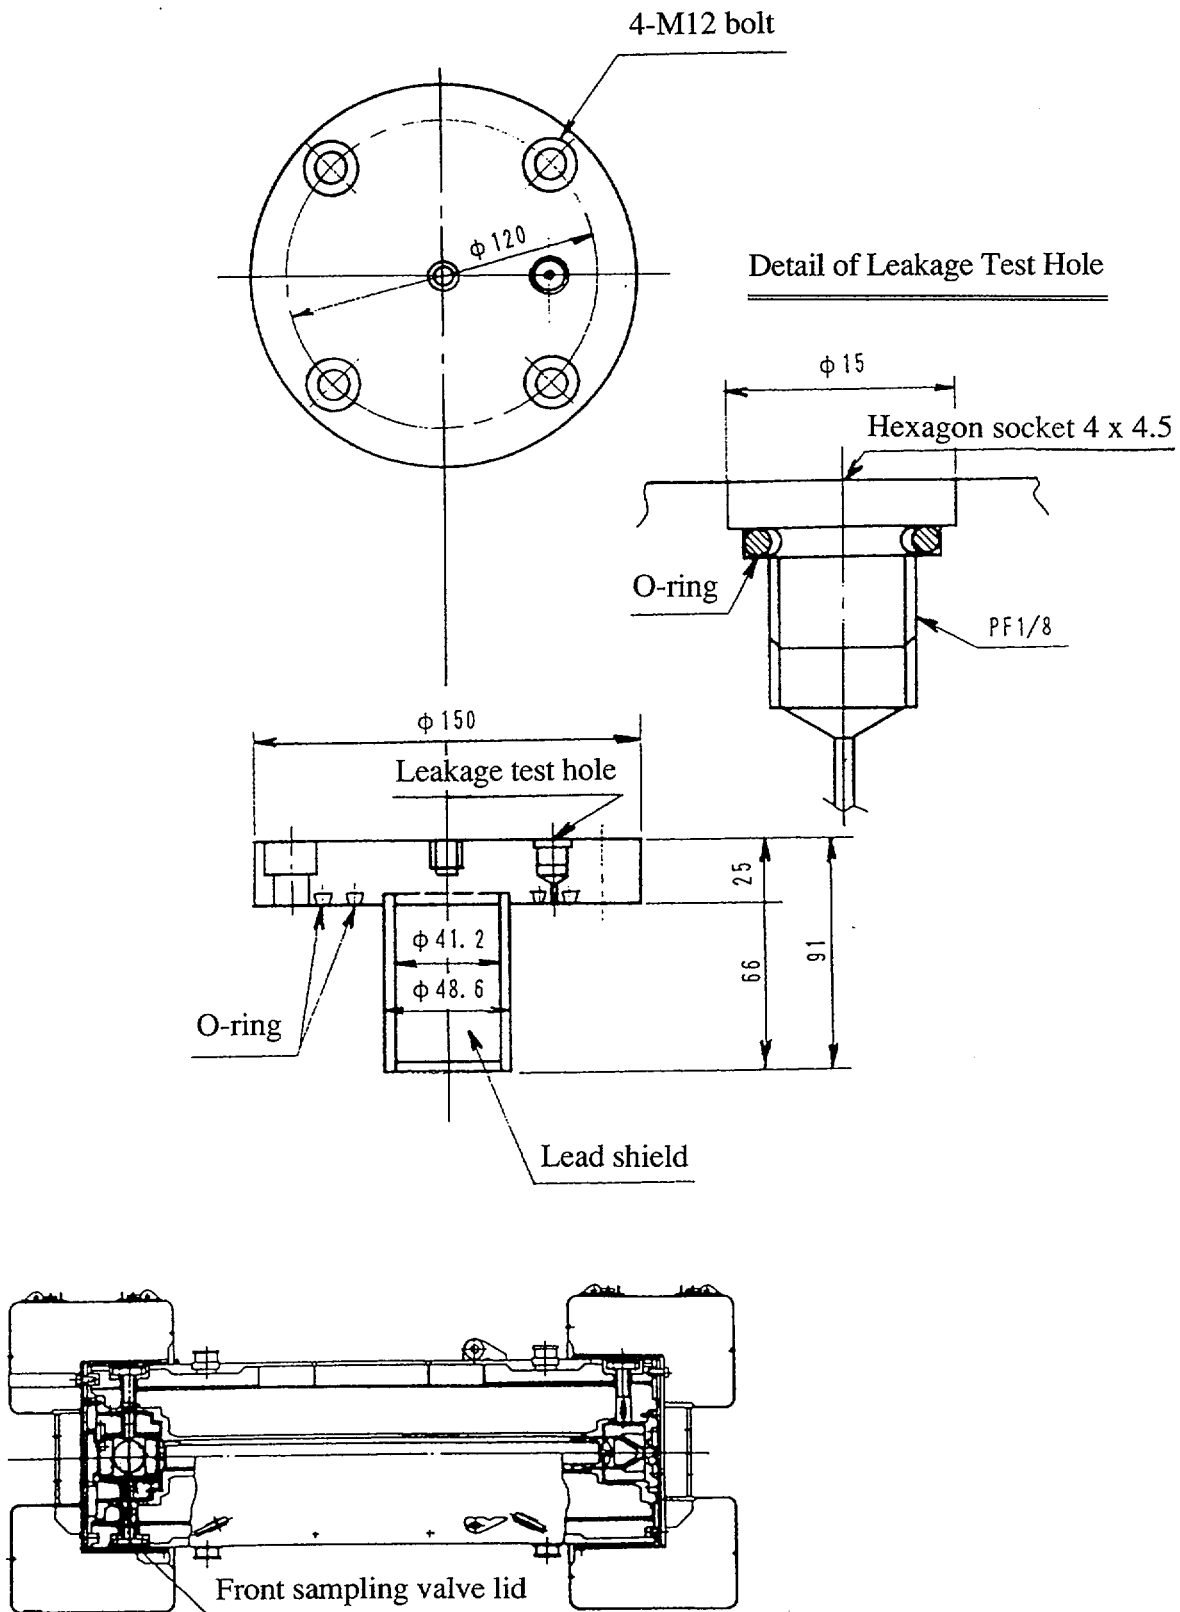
Penetration Hole Lid for Front Sampling Valve (in mm)
